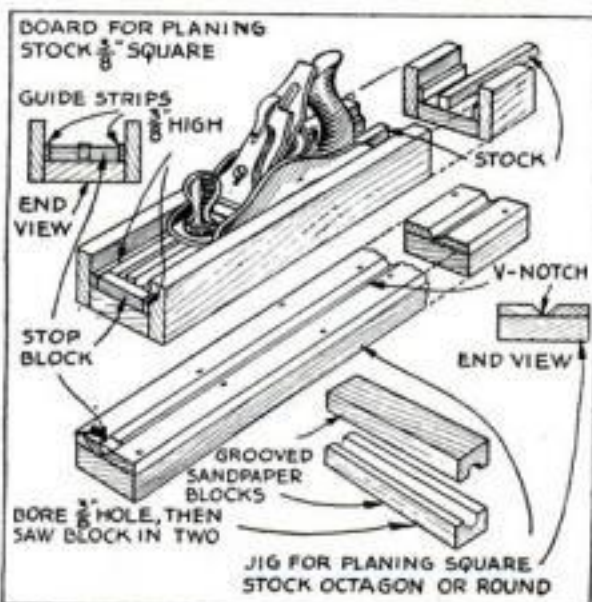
Homemade planing boards for arrow shafts and a pair of grooved sanding blocks.
